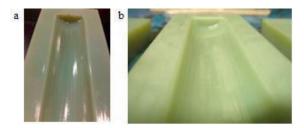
Hot-Pressed cavity (a) before molding; (b) after molding.
